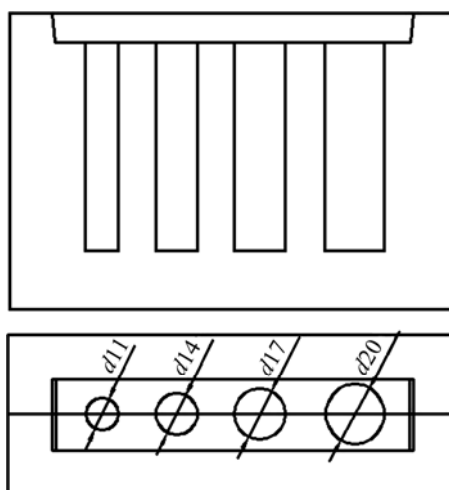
Schematic diagram of copper mould for rapid cooling experiment (The bottom drawing is a top view)
